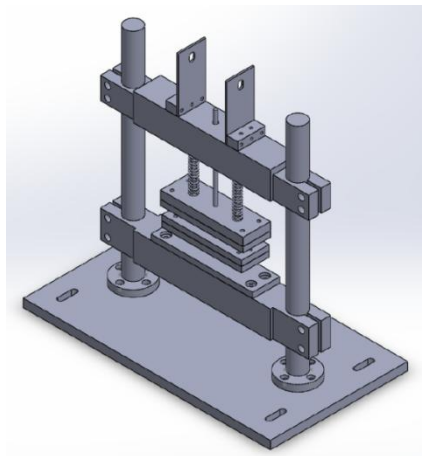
Isometric view of the assembly of the setup configuration defined in Table 3.5
